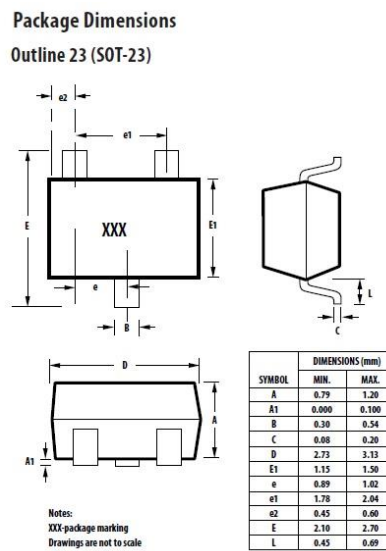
Package dimensions of the HSMS-2862 used in the combiner design.
